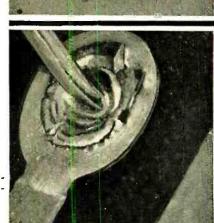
Dip-soldered pin—enlarged view. HEAVY DUTY
